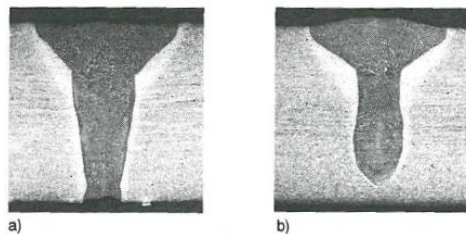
Cross-section of keyhole welds when using a) an Nd:YAG laser and b) a CO₂ laser at a power of 2000 W and a speed of 3m/s in a 2 mm thick Inconel alloy workpiece (Forsman, et al., 2001).
